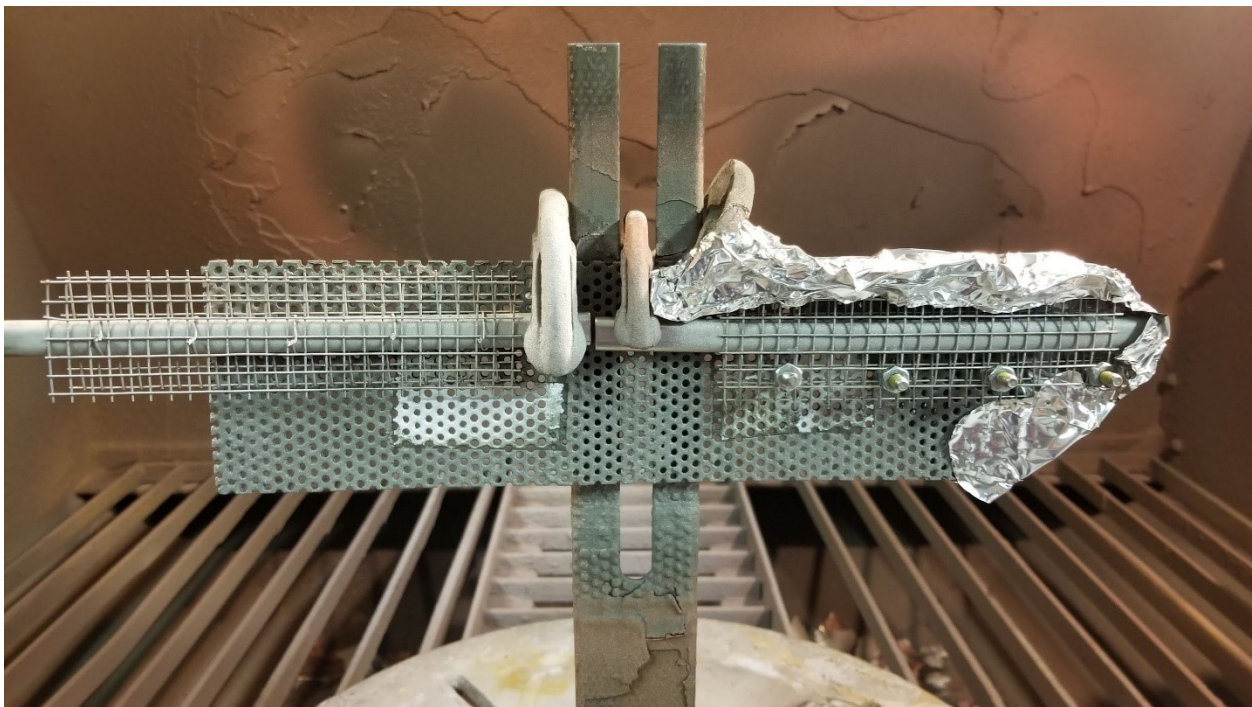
Two wire mesh clamping methods, wire tie method (L) compared with screw and nut method (R) with partial masking by aluminum foil to protect screw threads from coating deposition
